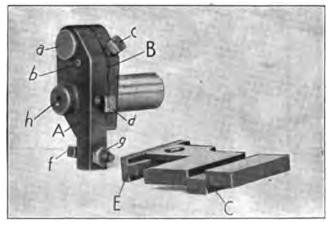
B. & S. Swing Tool-holder and Rising Block for Operating it
